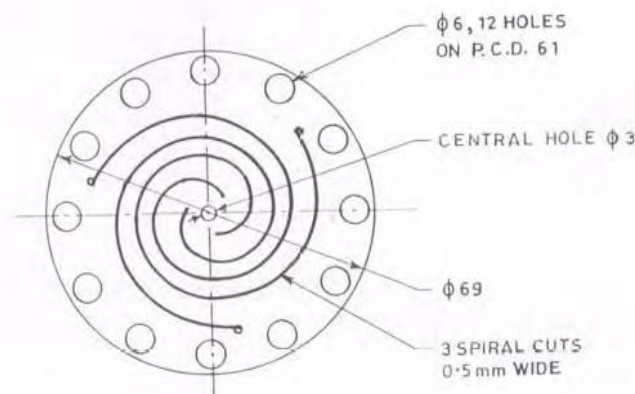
Typical Flexural Unit For Linear Compressor bearing
